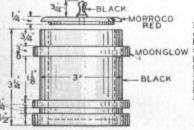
The drawing at left shows the principal dimensions for Machining the Cast Plastic Cigarette Box.
